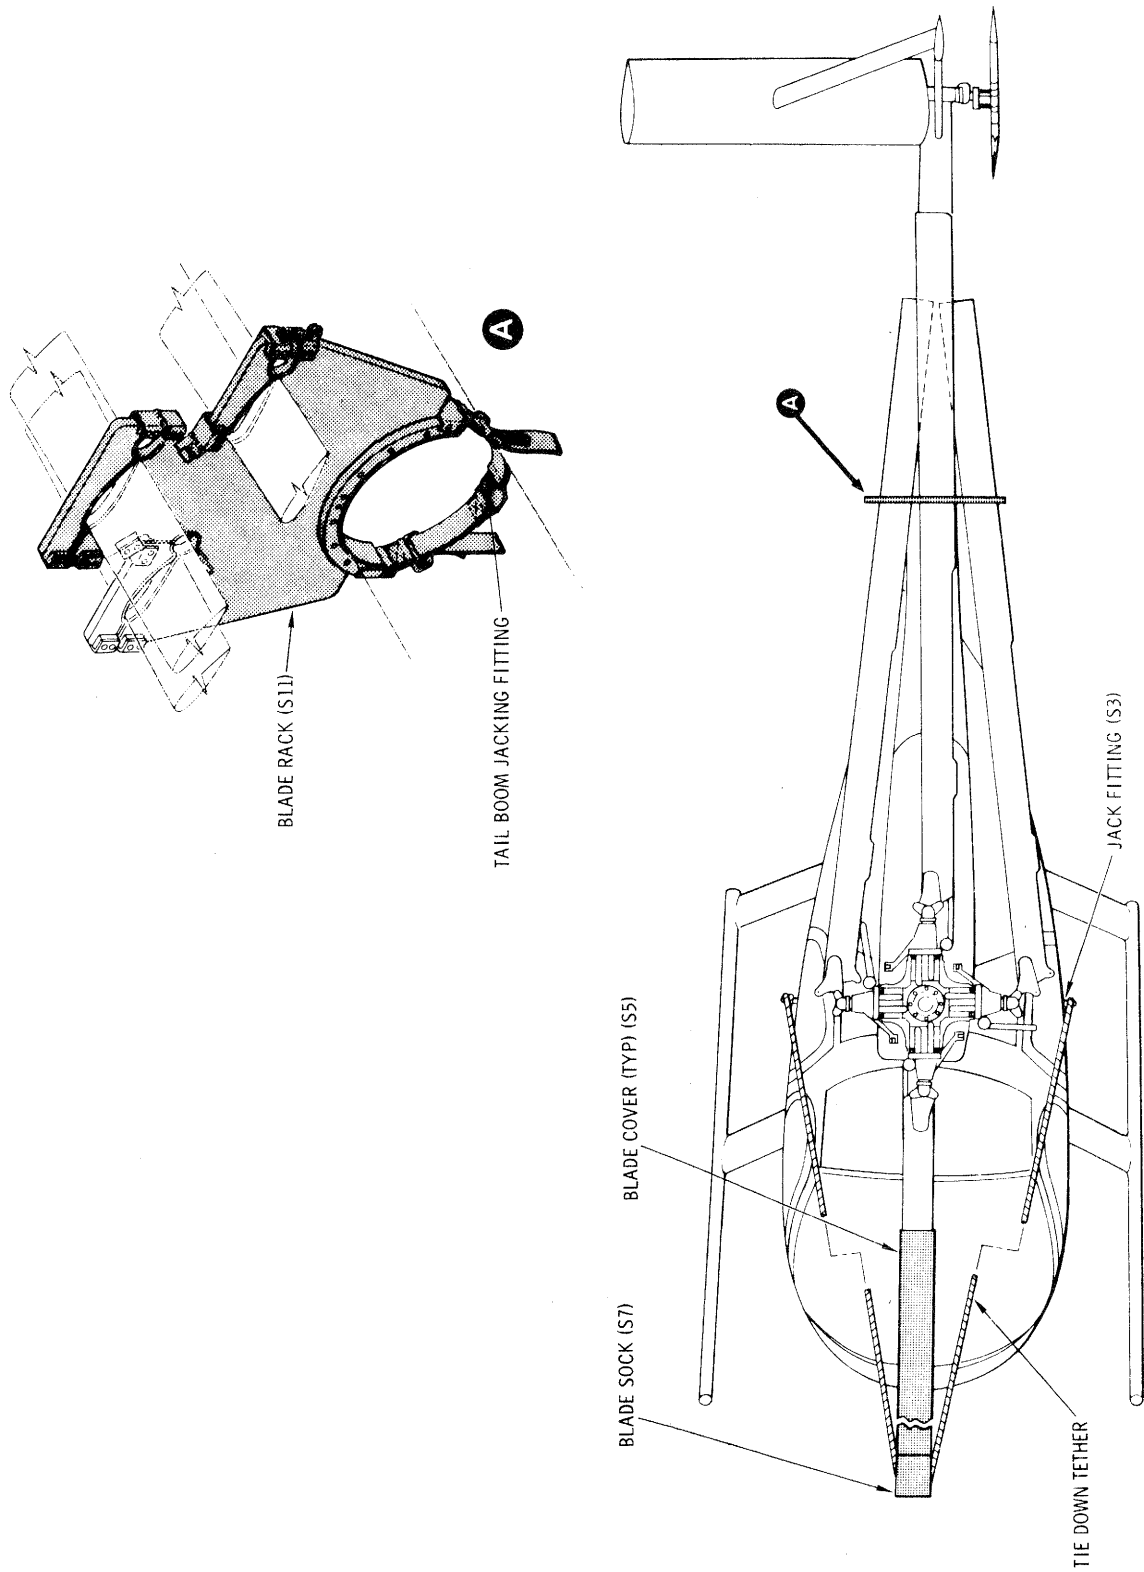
Folding and Stowing of Main Rotor Blades.
